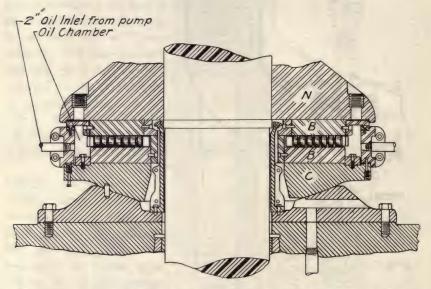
Combined Roller and Disc Bearing of the Mississippi River Power Co. (see page 254).
